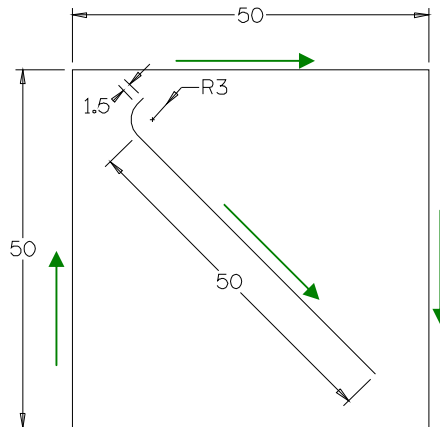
Specimen geometry and laser cutting direction, dimensions in mm.
